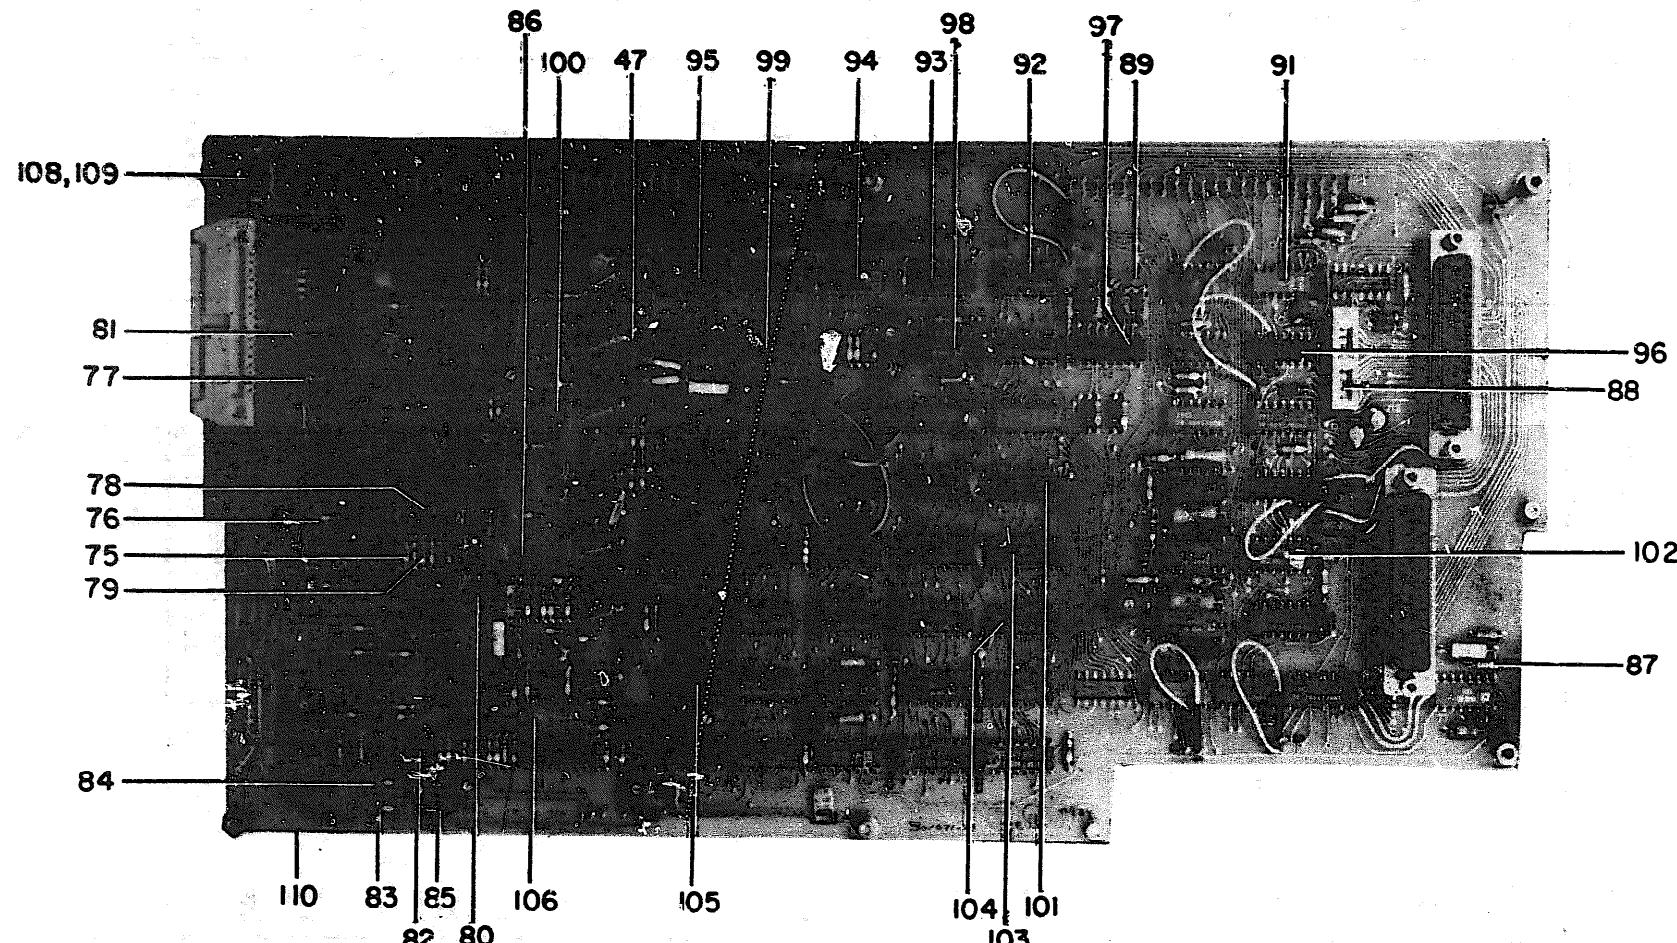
Circuit Card Assembly, Drive Electronics Module (Sheet 2 of 3)
